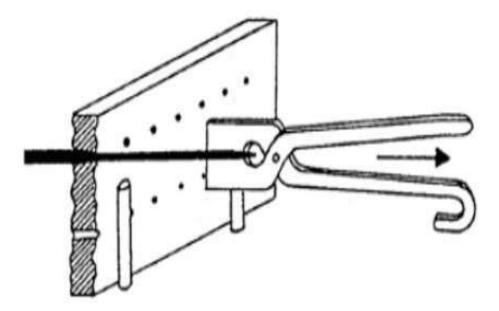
Drawing wire from a drawing plate [Source: Schwarcz and Varga (2010)]
